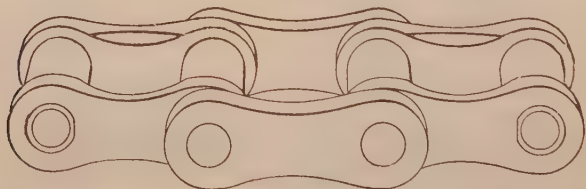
Section of a driving chain, showing arrangement of the rollers and side links.
